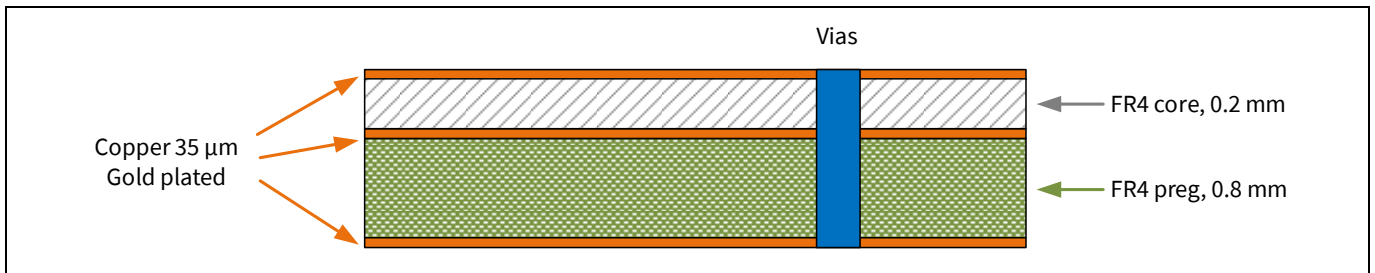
PCB stack information for the evaluation boards with PCB marking BFRxxxF, BFR3/4xxL3 and M11117
